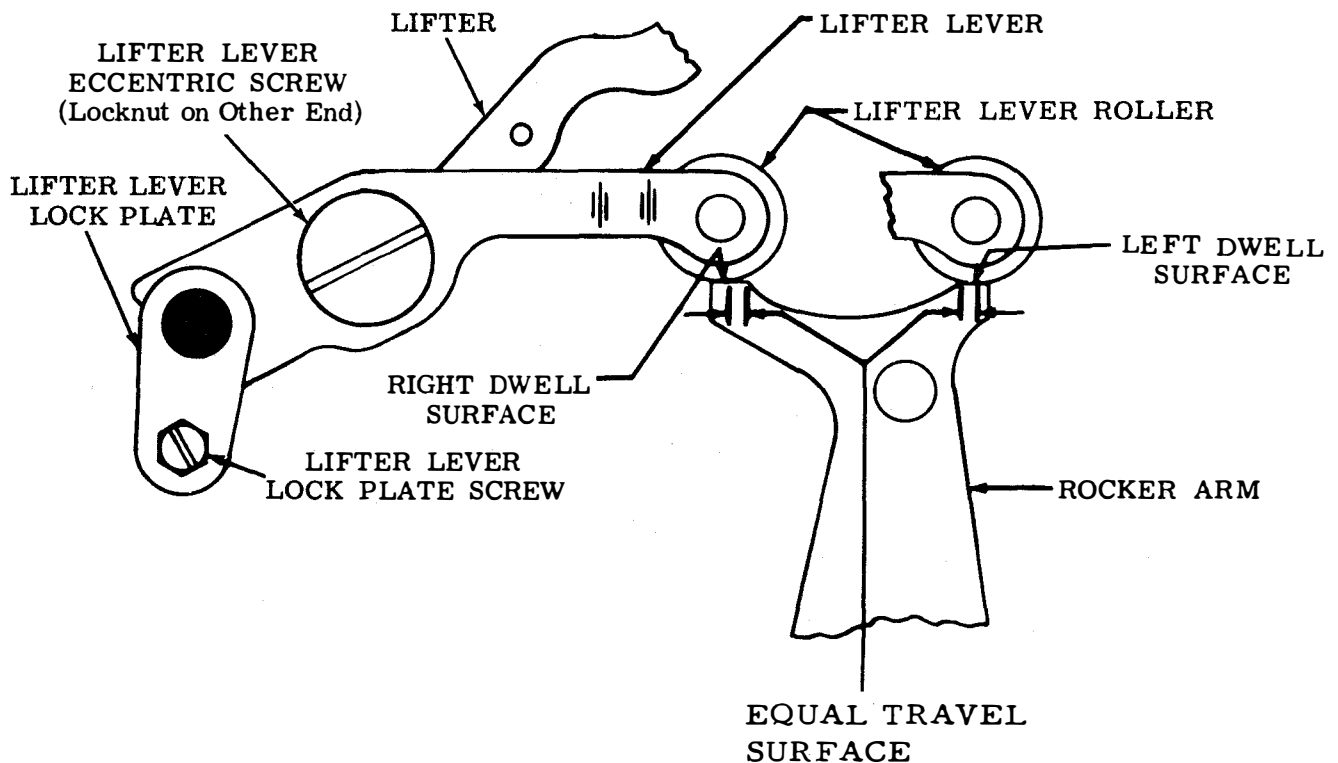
Cam Follower Roller Arm Position - Rear View
